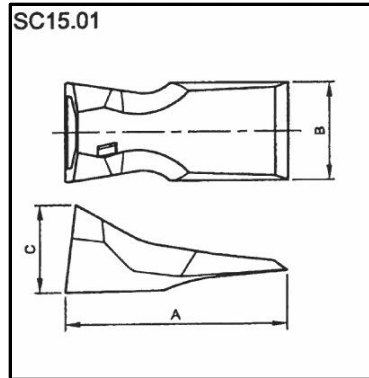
Vosta LMG type SC15.01 wide cutter tooth dimensions. A 278 mm, B 109 mm, C 118 mm.²¹
